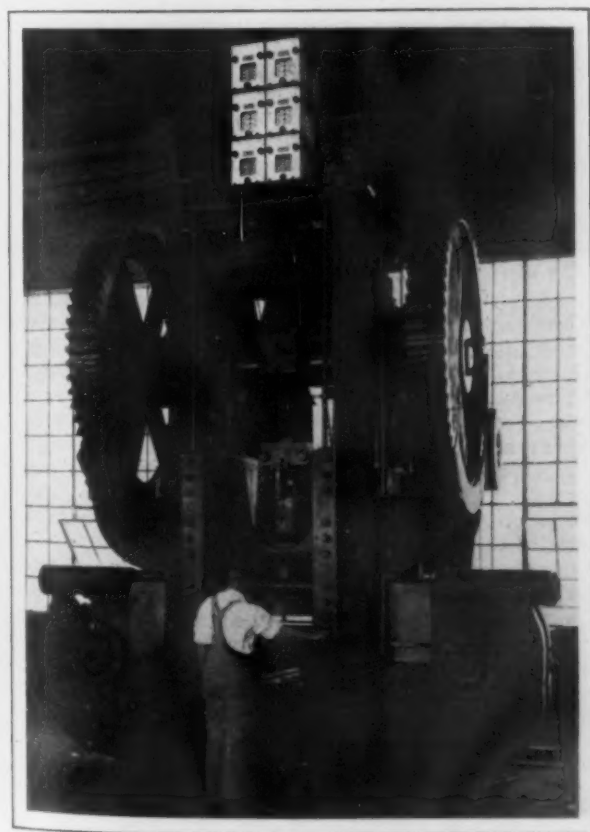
The Straight Sided Double Gear Press on Which the Metal Flange is Pressed Into Its Finished Form
